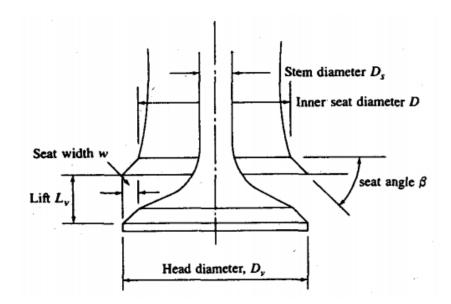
Parameters defining valve geometry including the seat angle [9]
